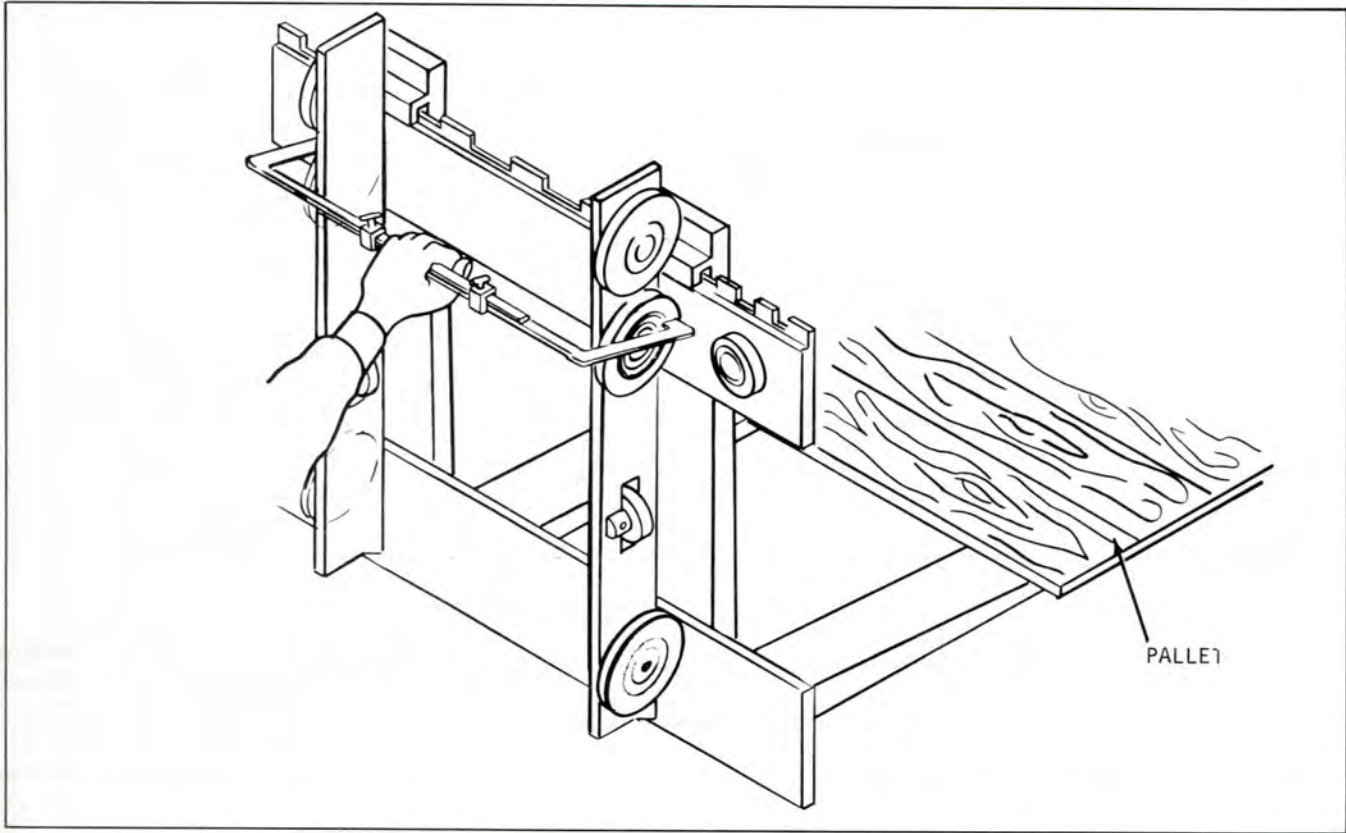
Spanning Upper Rollers (Six Roller Carriage)
